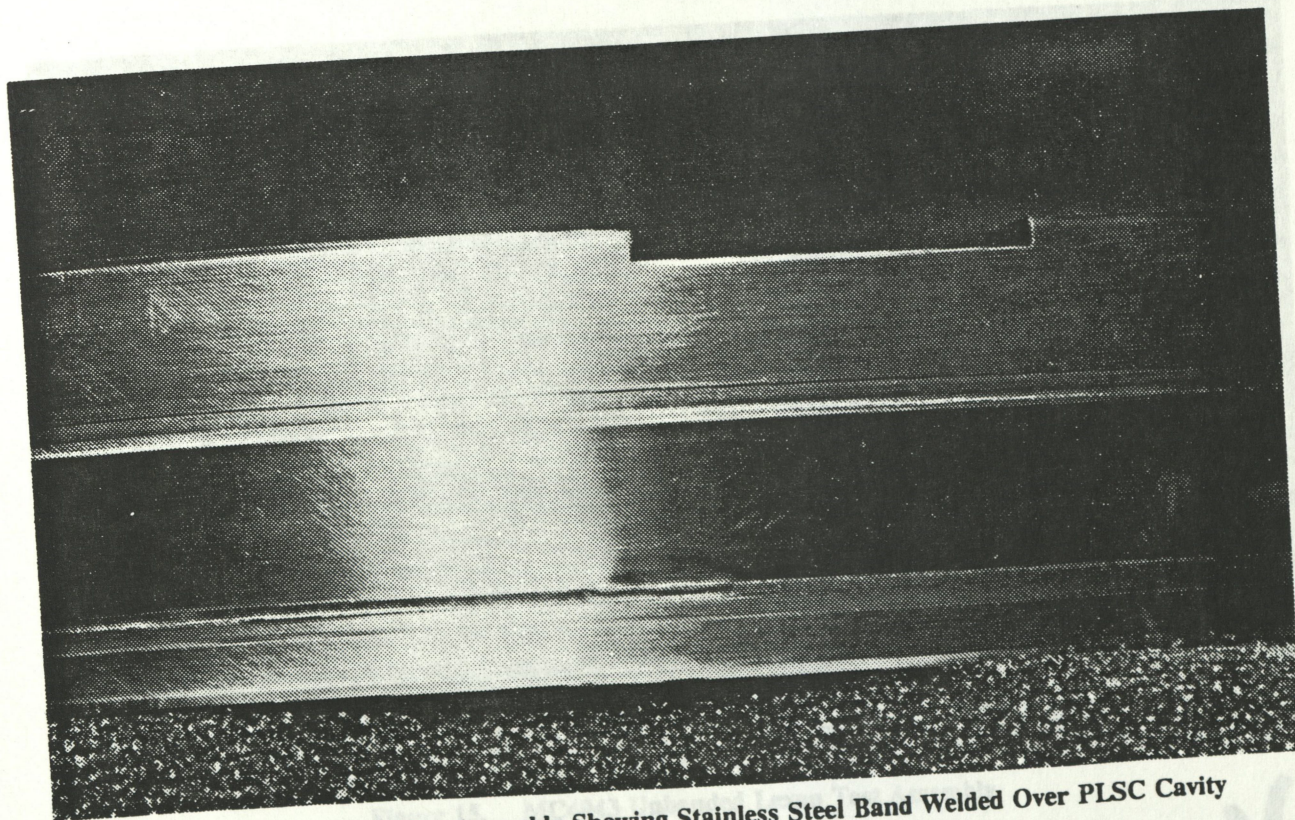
MC4043 Test Assembly Showing Stainless Steel Band Welded Over PLSC Cavity
